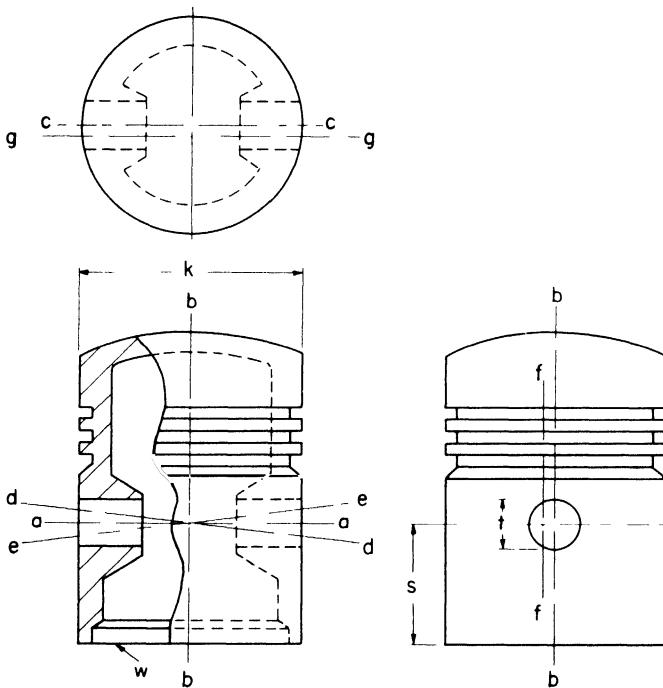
Automotive-type piston showing some of the dimensions that are to be checked.
